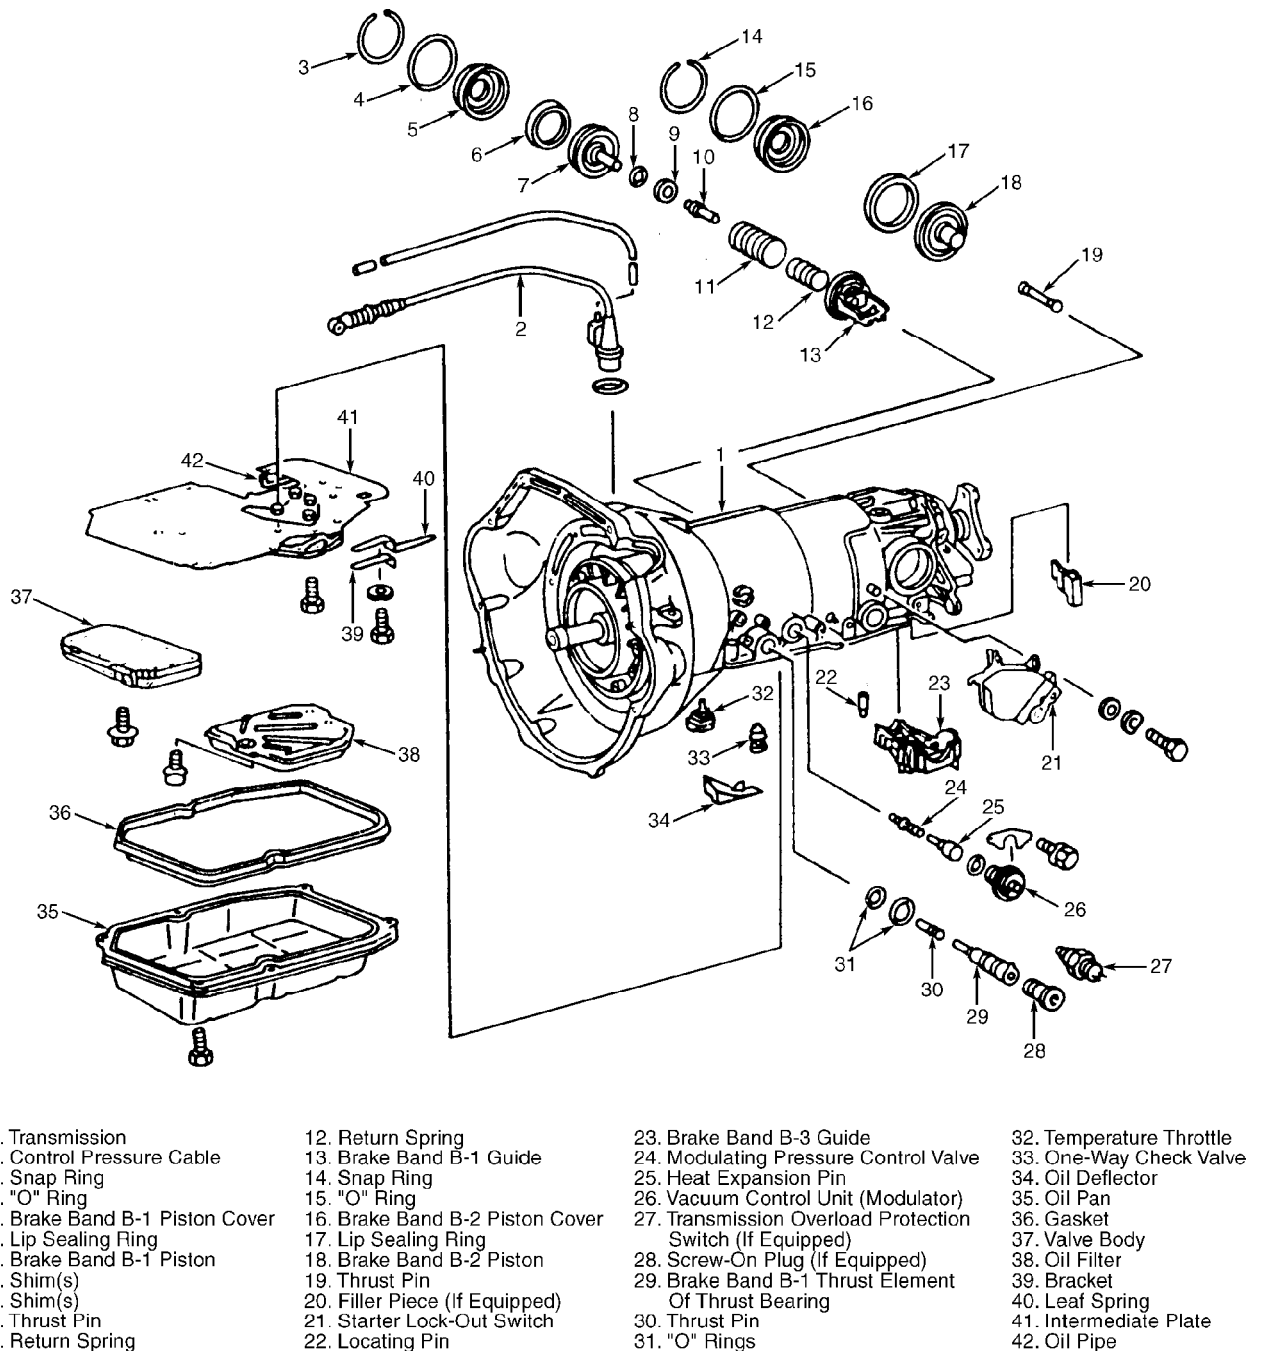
Exploded View Of Transmission Case External Components (722.3 & 722.4 Series)
